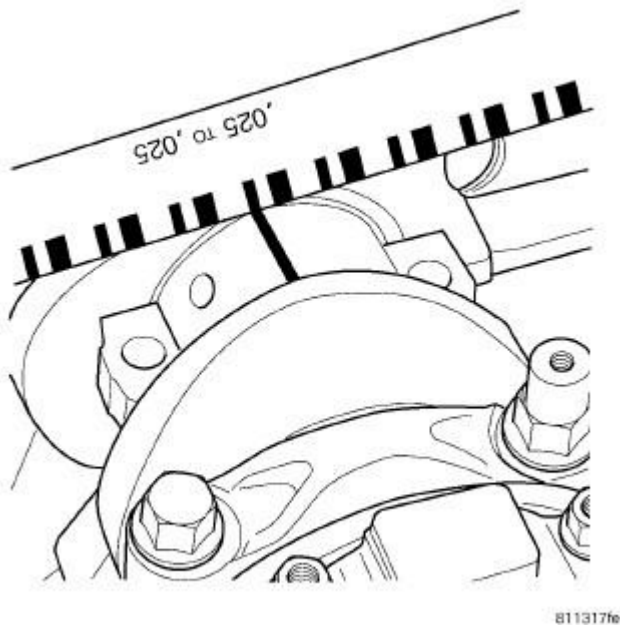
CONNECTING ROD BEARING CLEARANCE
